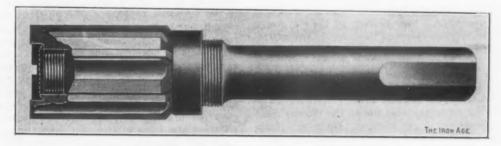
The New McCrosky Universal Adjustable Reamer, Machine Type.
